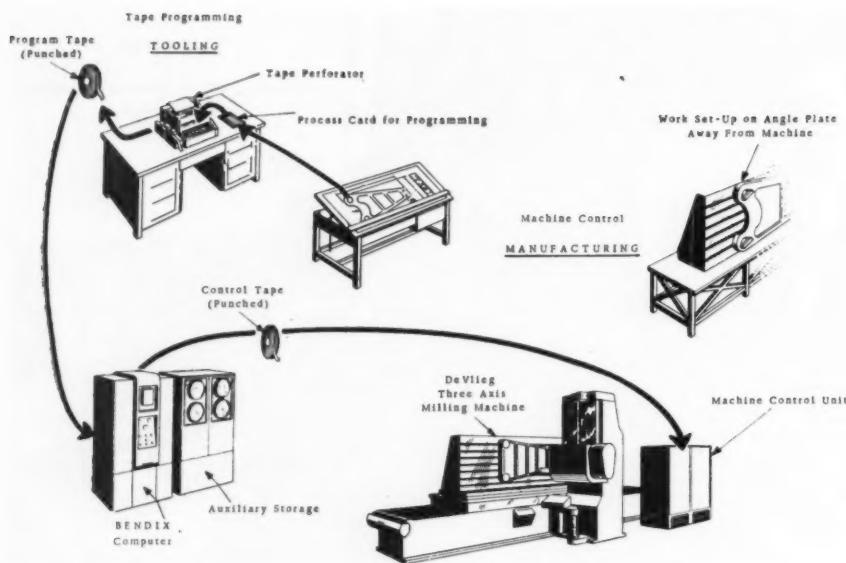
Basic steps in machining with the numerically controlled milling machine to speed up production of aircraft parts
